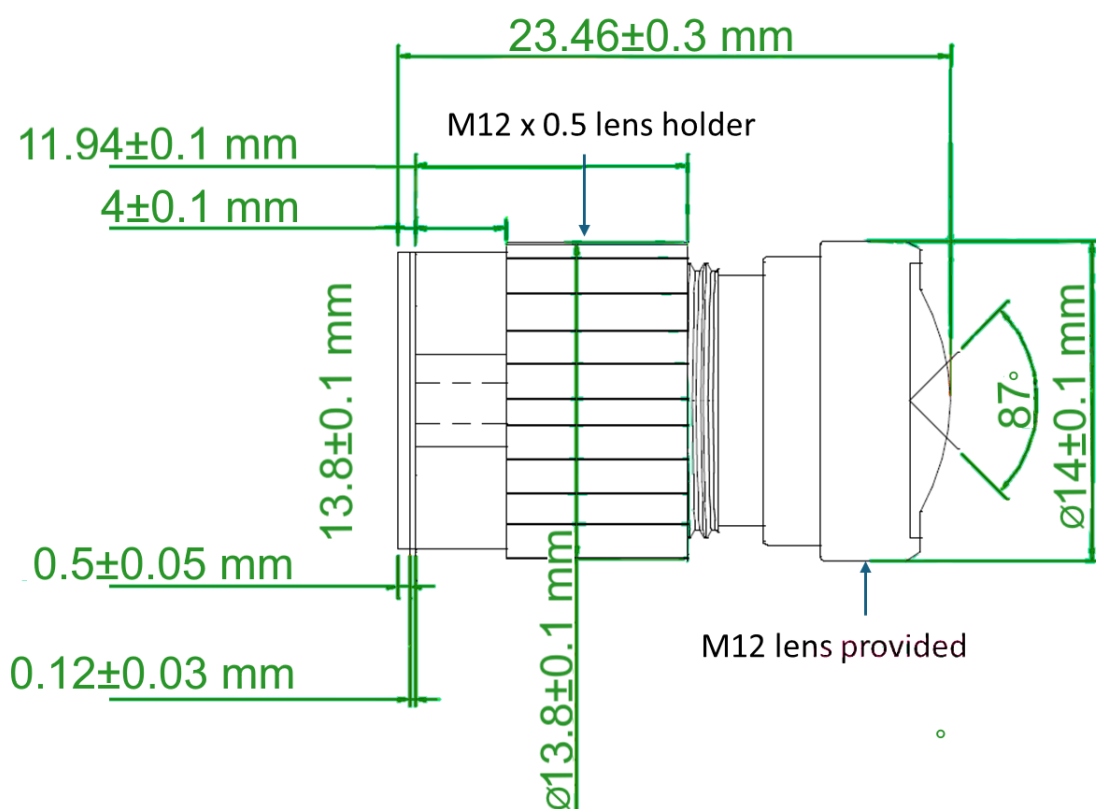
Dimensions of the M12-mount lens (in millimeters)
